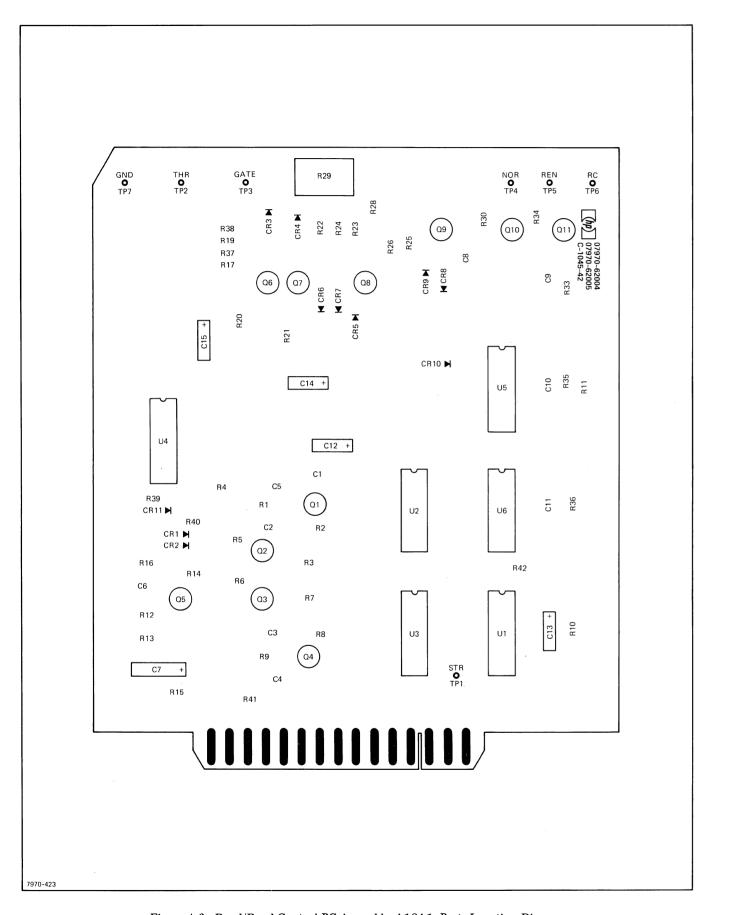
Read/Read Control PC Assembly A18A1, Parts Location Diagram
